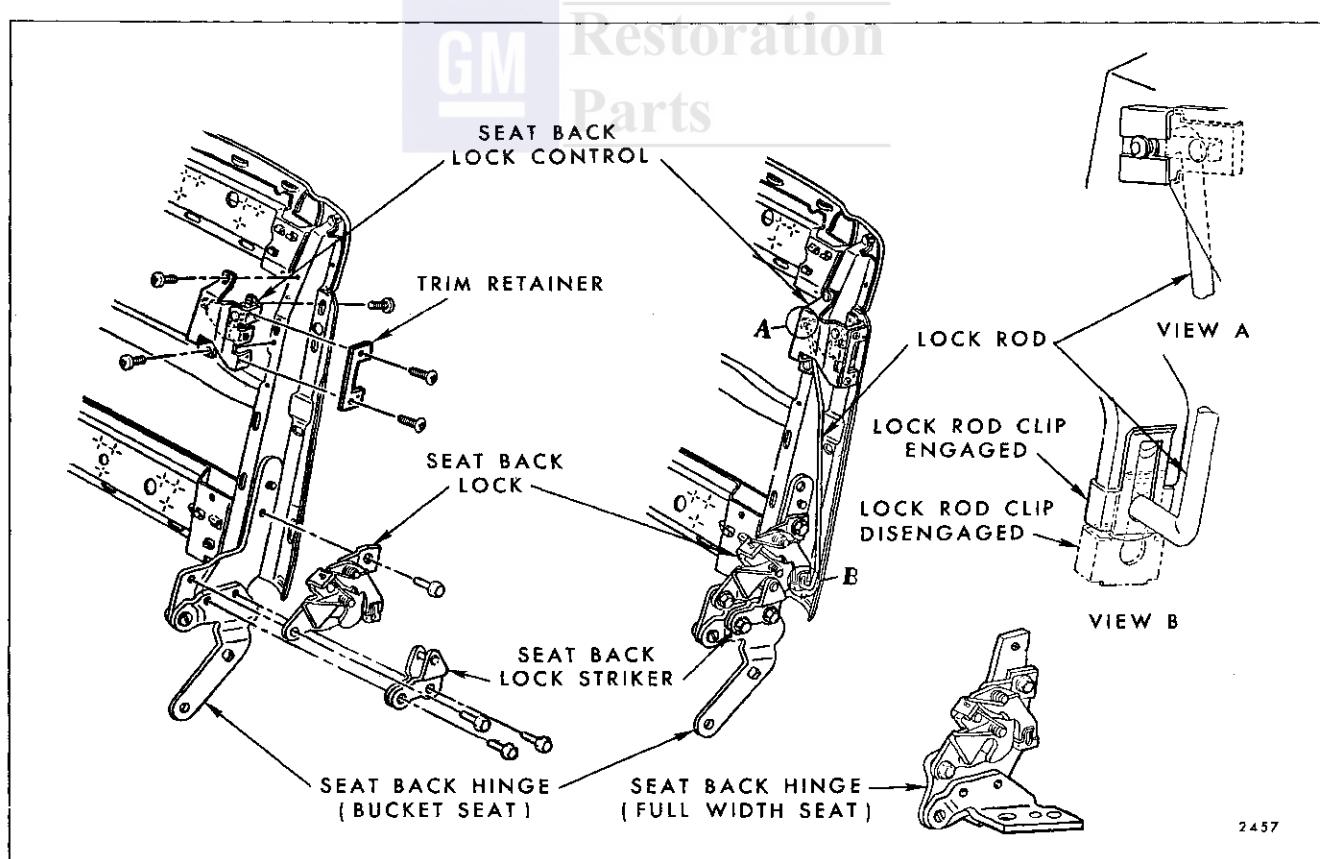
Seat Back Lock, Lock Control and Lock Rod — Strato Full Width and Bucket Seats
